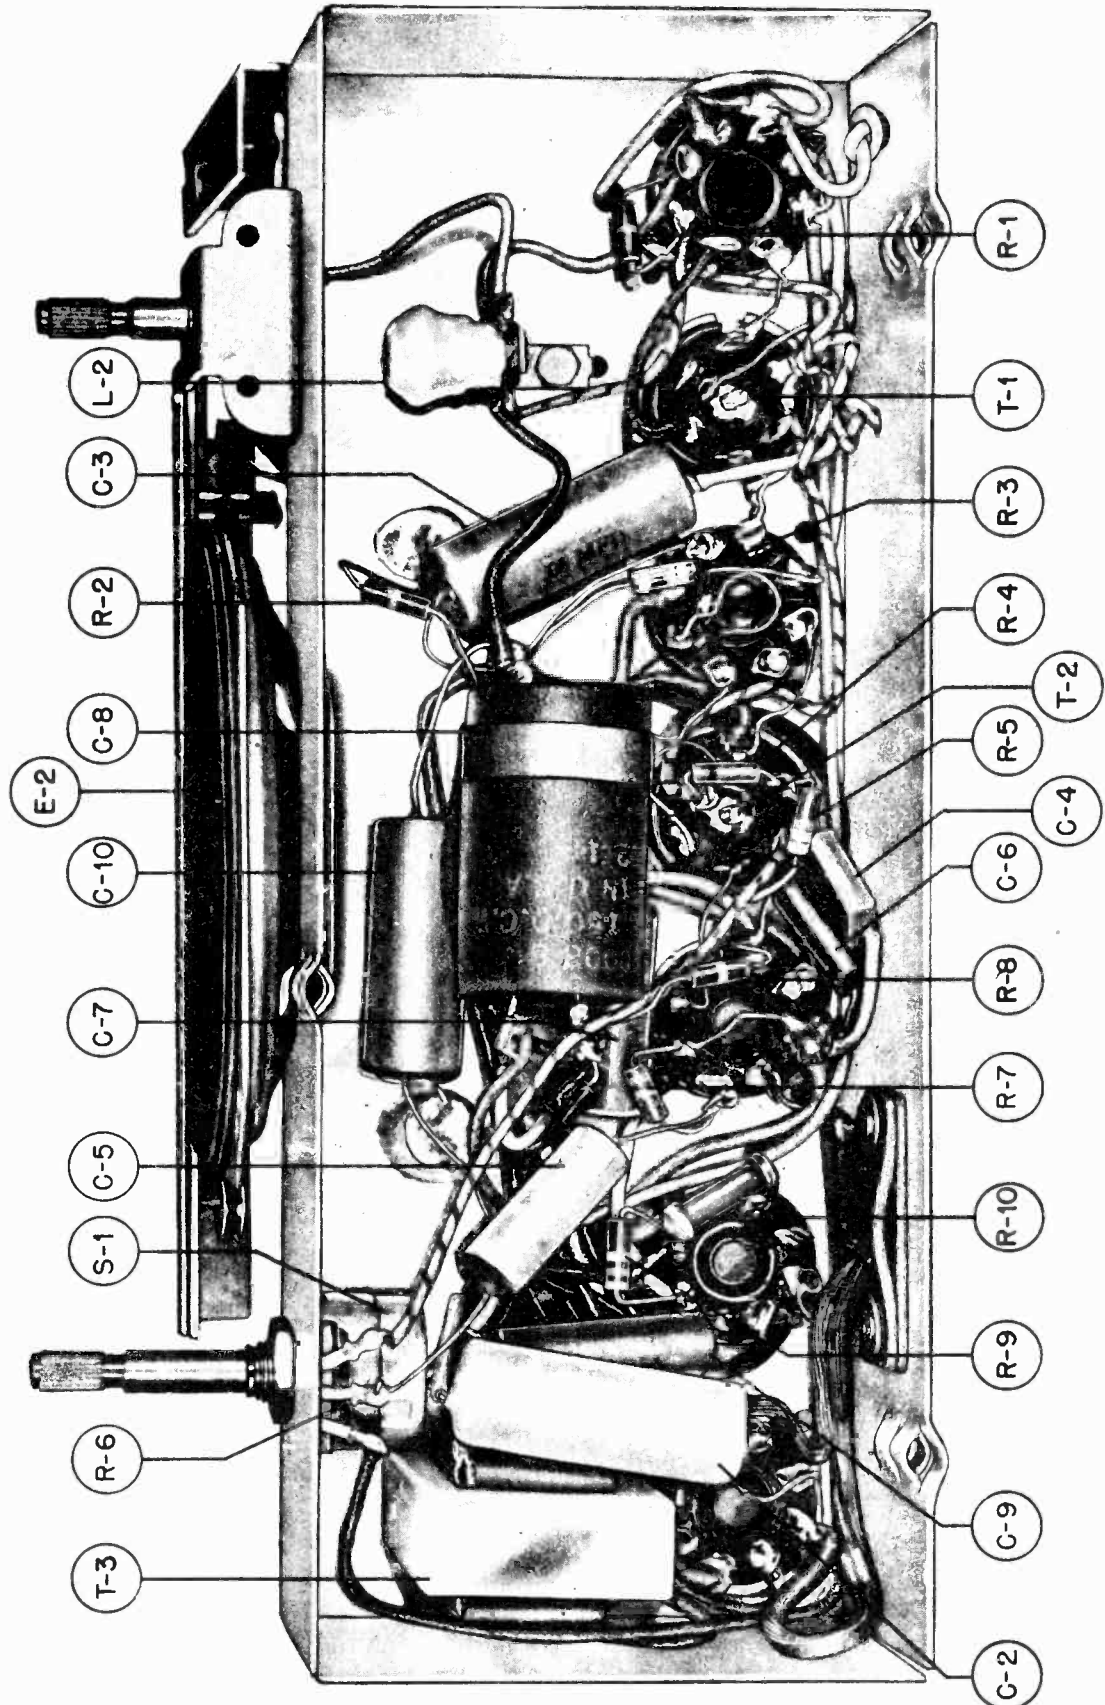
BOTTOM VIEW (CHASSIS HS-50)
